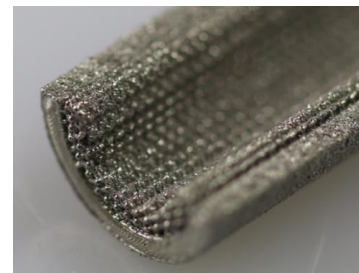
AM Heat Pipe Half Pipe, Lift Height Test Piece
